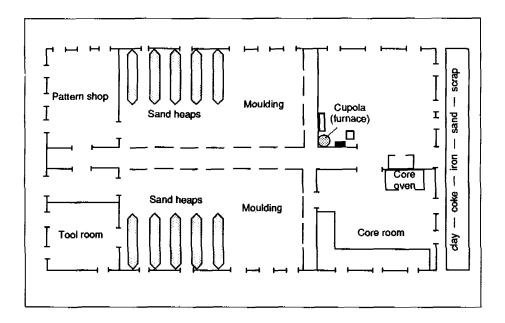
A typical foundry layout (Source: Battelle Memorial Institute)
